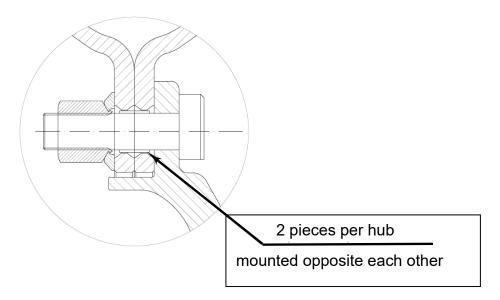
Mixed centering with two sleeves on dual wheel attachment
